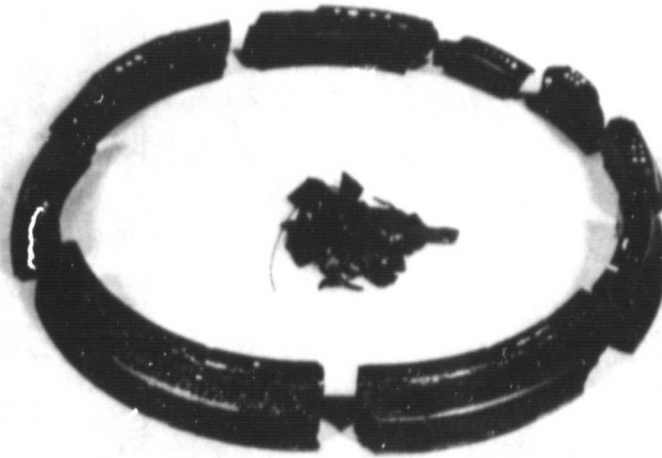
Fractured bearing inner race initiated by a rolling-element fatigue spall. (From ref. 34.)
